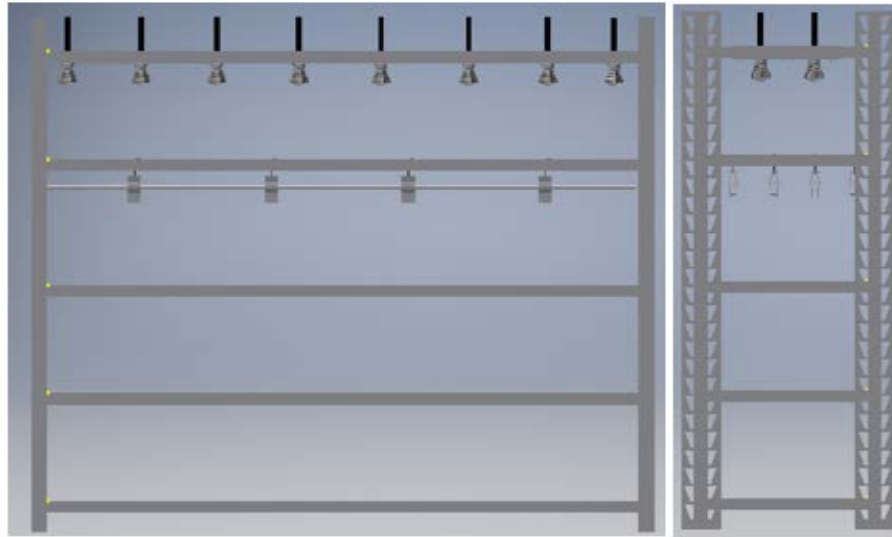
Final assembly draft. Inventor Autodesk draft of final assembly of fiber optic cable.
